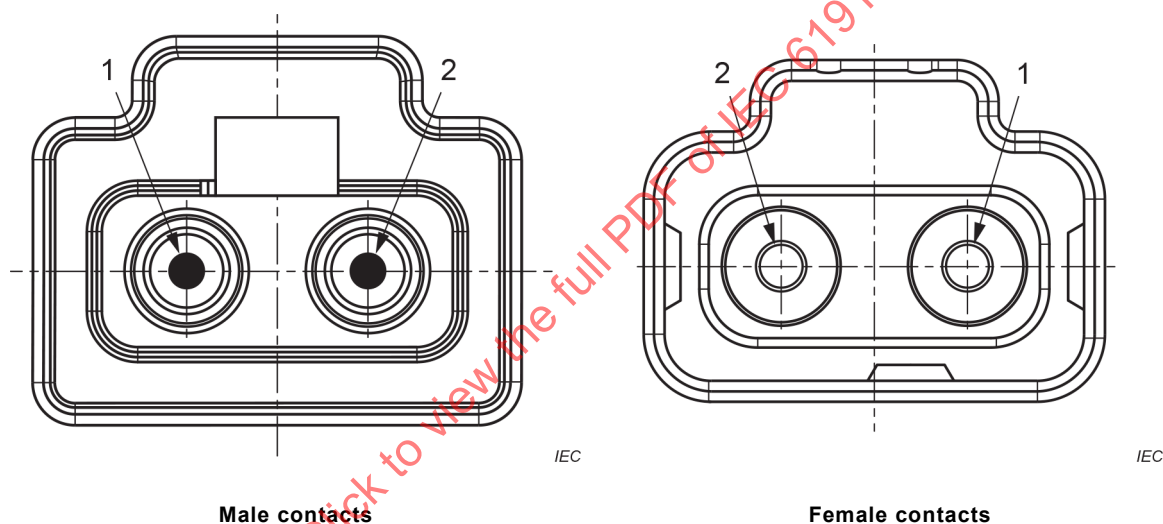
Mating parts of the IEC 63171-6 connectors
